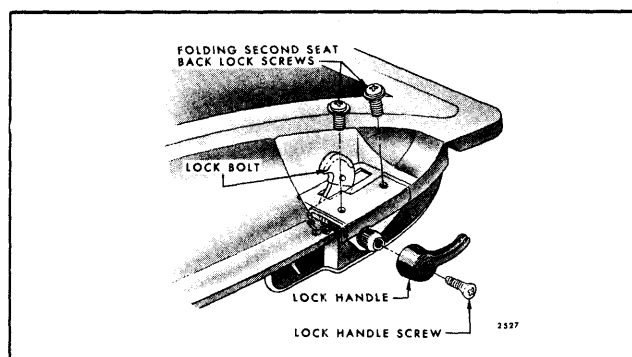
Folding Second Seat Back Lock Installation - All "A & B" Station Wagons (Except Vista Cruiser and Sport Wagon Styles)
